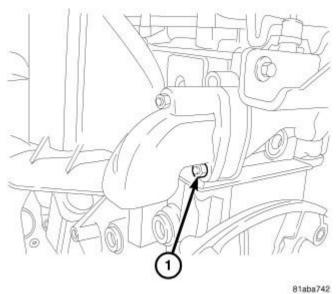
Intake Manifold Nuts Courtesy of CHRYSLER LLC
